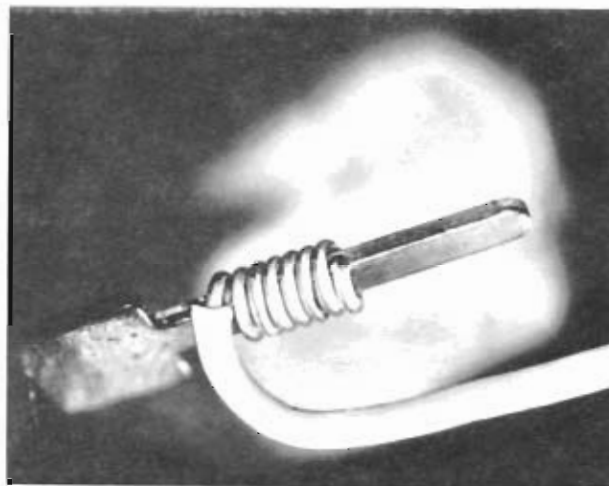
SOLDERLESS WRAPPED CONNECTION (SWC)
